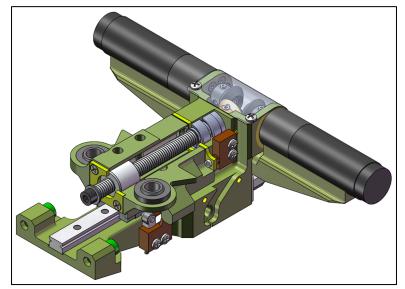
Motor Bracket Assembly in the set-for-flight state
